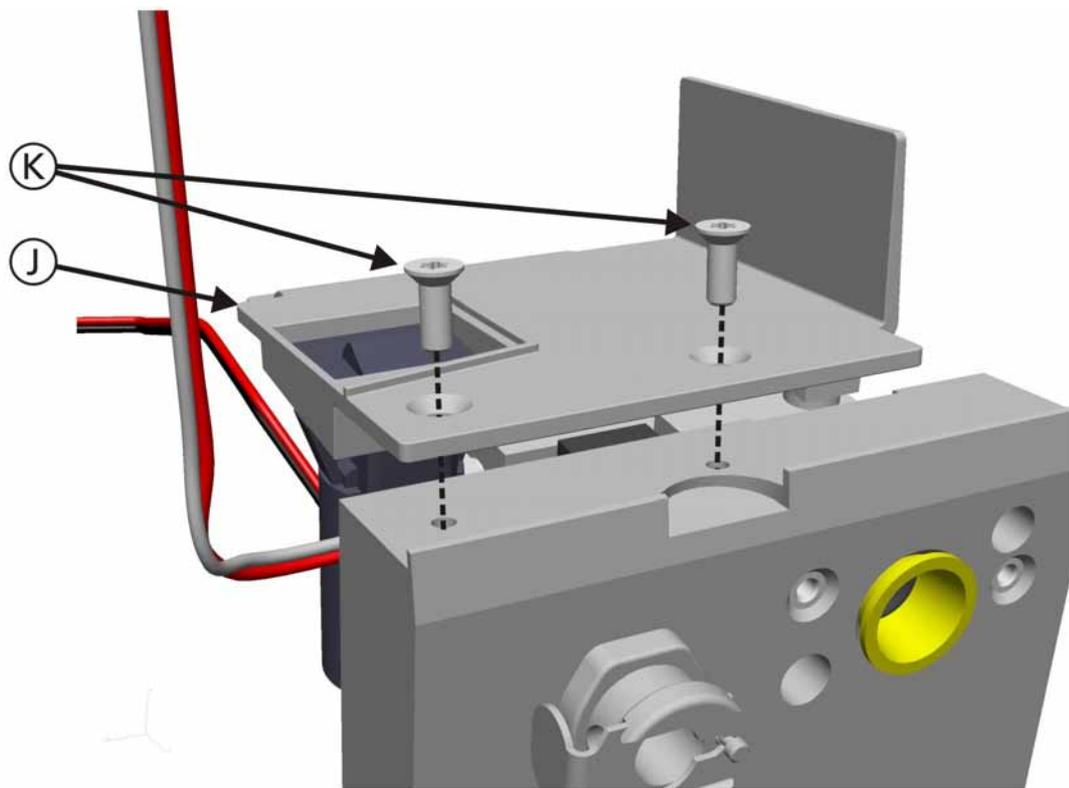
Oxygen Mixer Block Assembly, Step 4
